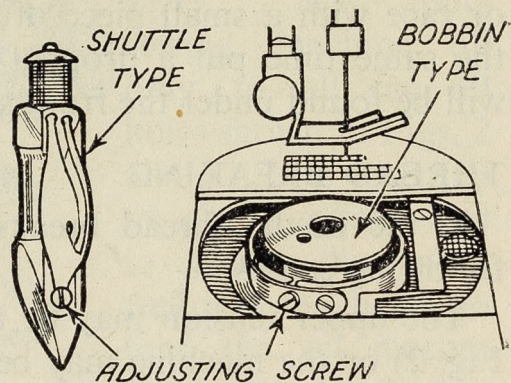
The under thread tension is adjusted by means of a small screw. Both the shuttle and bobbin types are shown here.
